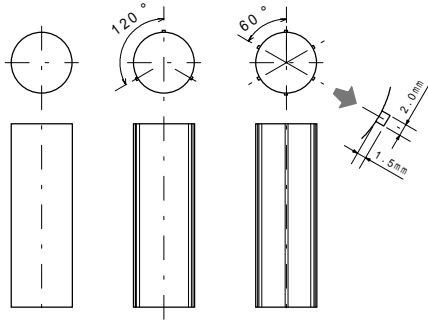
Protrusions fixed on the outer surface of the inner cylinder
